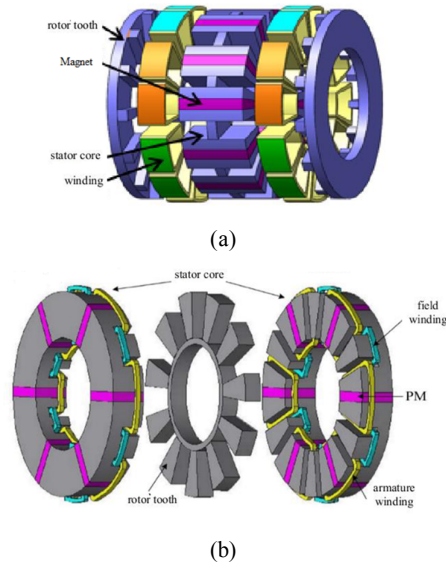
Axial flux switching machine a) hybrid excitation with E-shaped core b) two rotors
